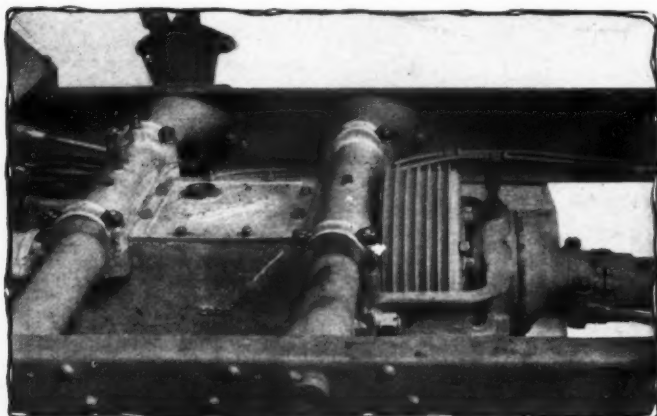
Crossley gearbox attachment on the 1913 20-horsepower chassis
